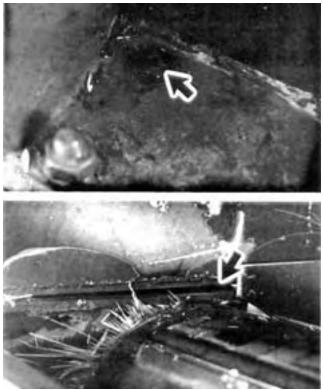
Frame Failure: (Upper) Broken Bolt, (Lower) Spreading Between the Front Housing and the Roller Support Bracket.
